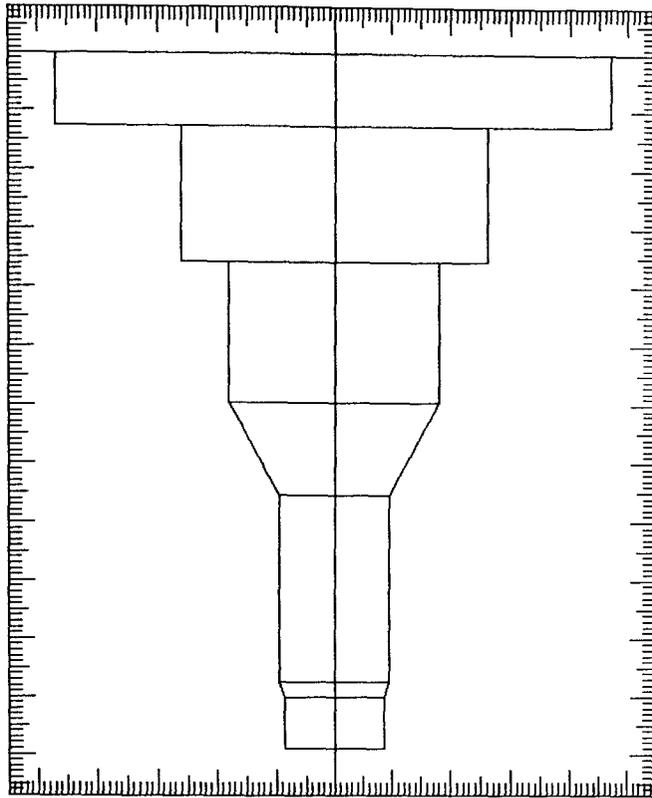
Maestro Stub Axle, WFM 2029 (machined part)
